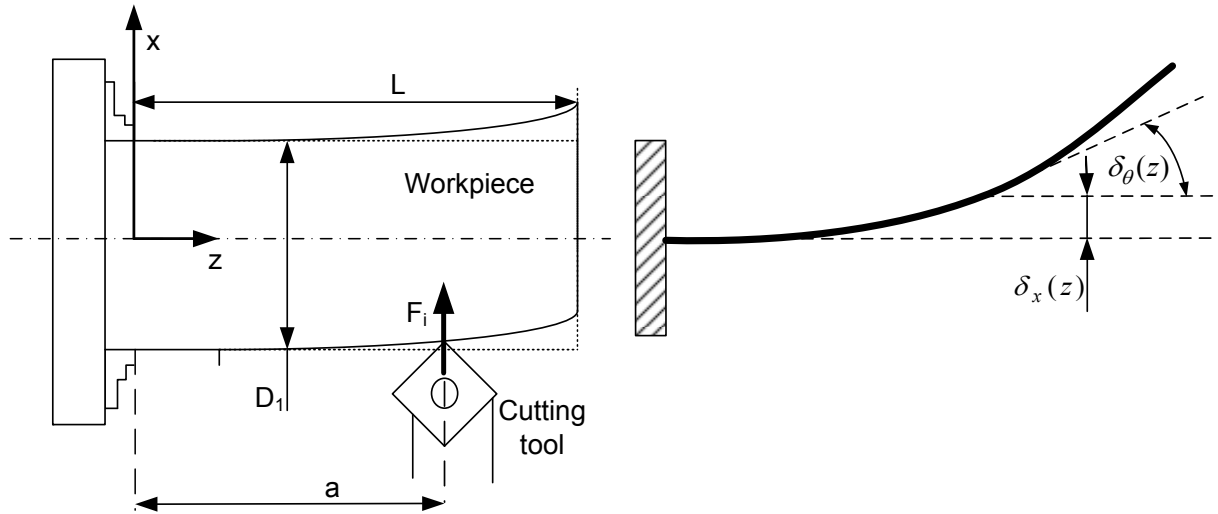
Turning deflection for a workpiece clamped in a chuck.
